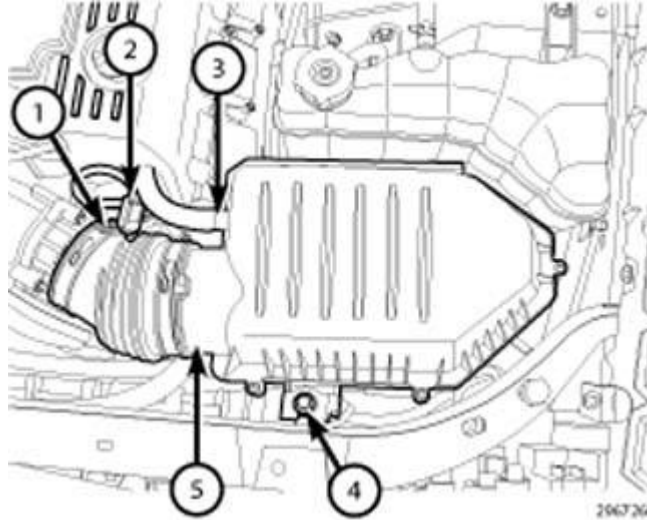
Air Duct Retaining Clamp, Intake Air Temperature Sensor Electrical Connector, Makeup Air Hose, Bolt & Air Cleaner Housing
